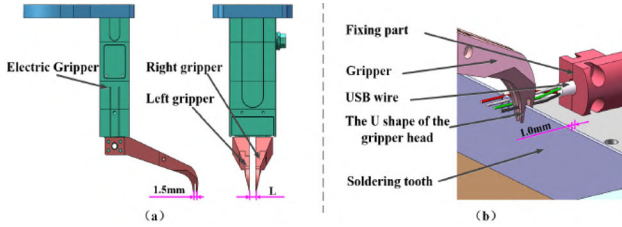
The structure of the small gripper. (a) The view of gripper component; (b) The view of placing the wire heads into the soldering tooth groove.
